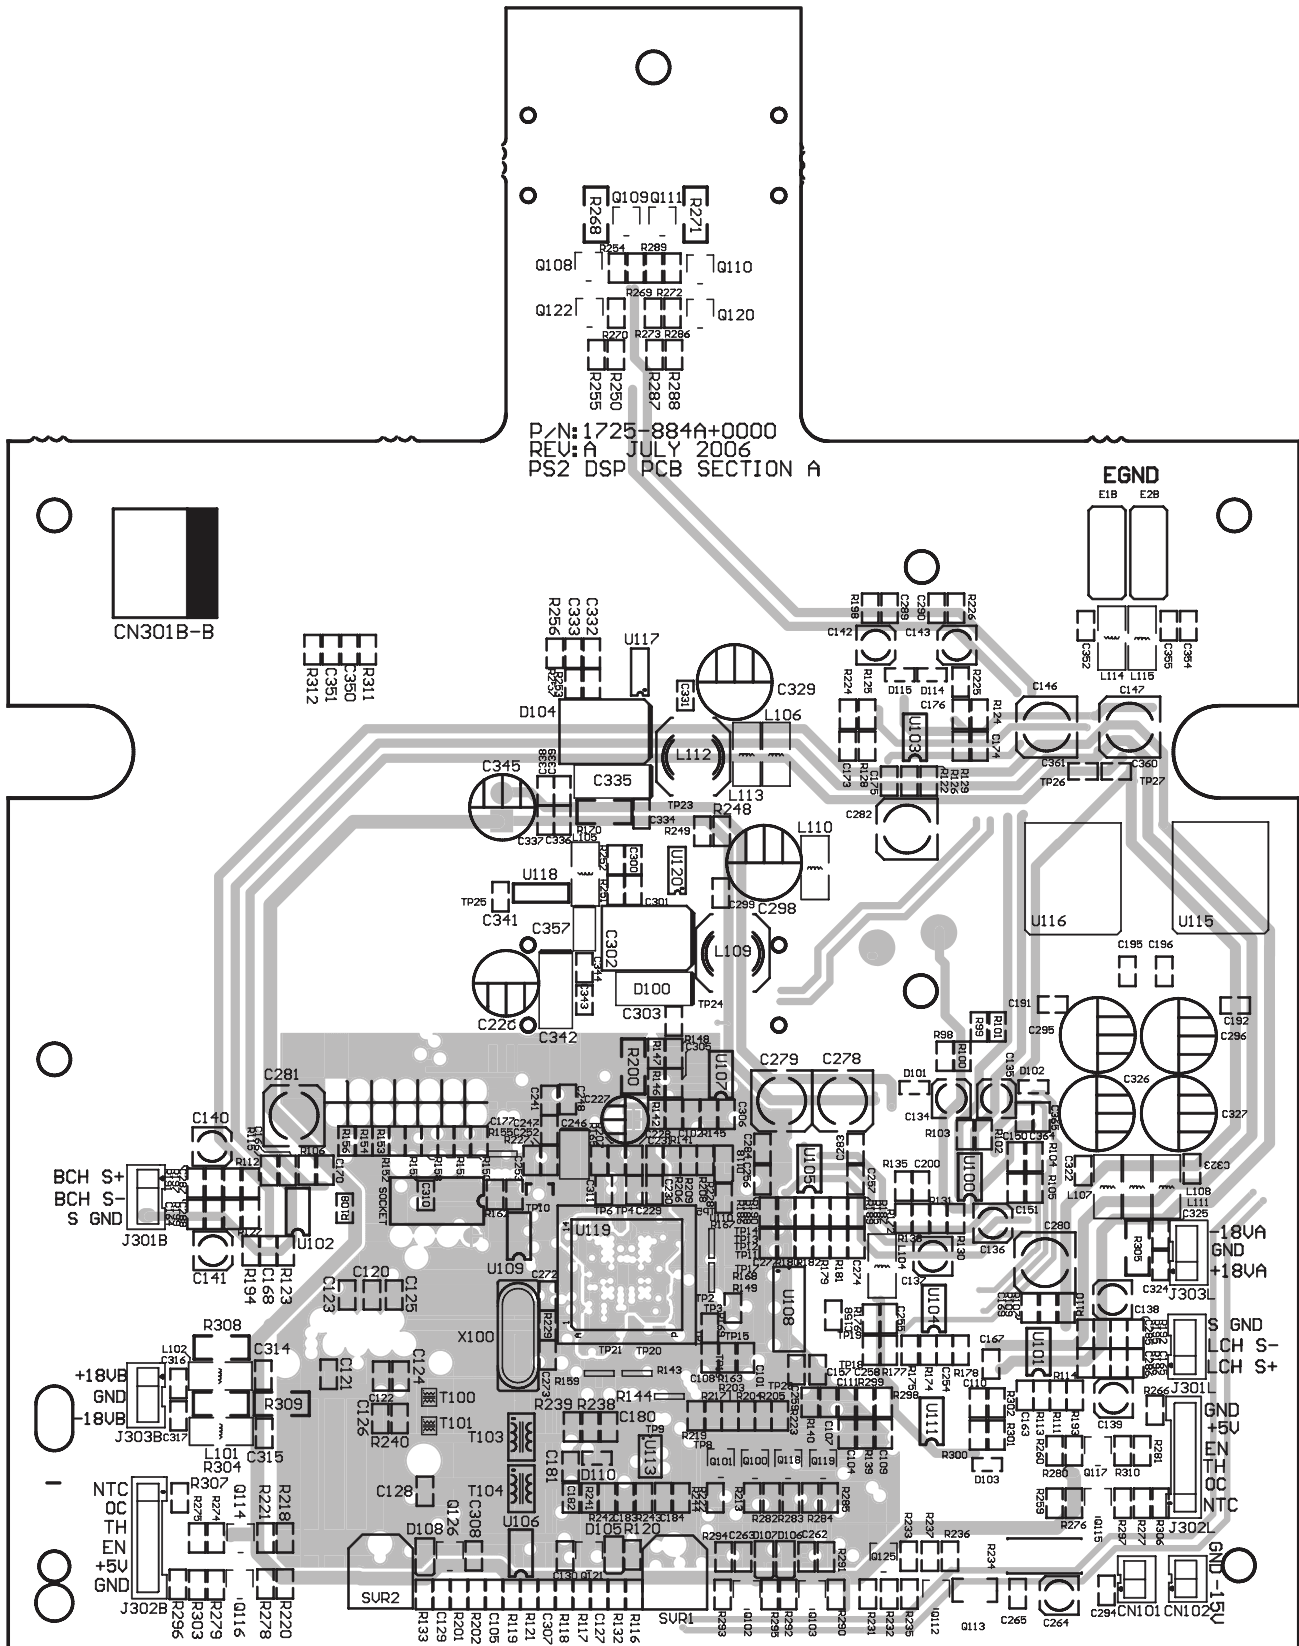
DSP PCB Bottom Silk and Internal Layer 1
